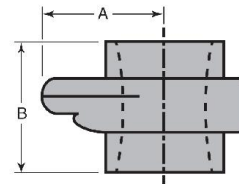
Butt Weld Color Code: Red Subs/Blue Nut
